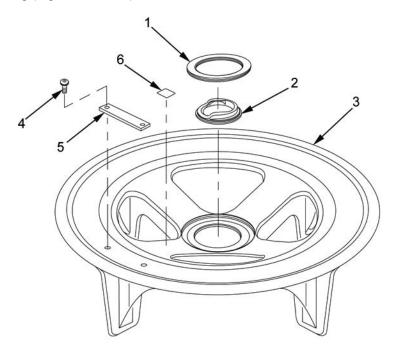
Disassembly/Assembly of Mortar Baseplate.
